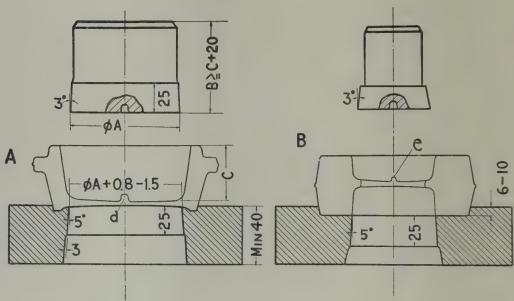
Design principles and standard dimensions of the piercing tools: A—Trimming blade and loose punch; B—Locating stand and loose punch; and (d, e)=Pegs for locating of loose punch on the forging
